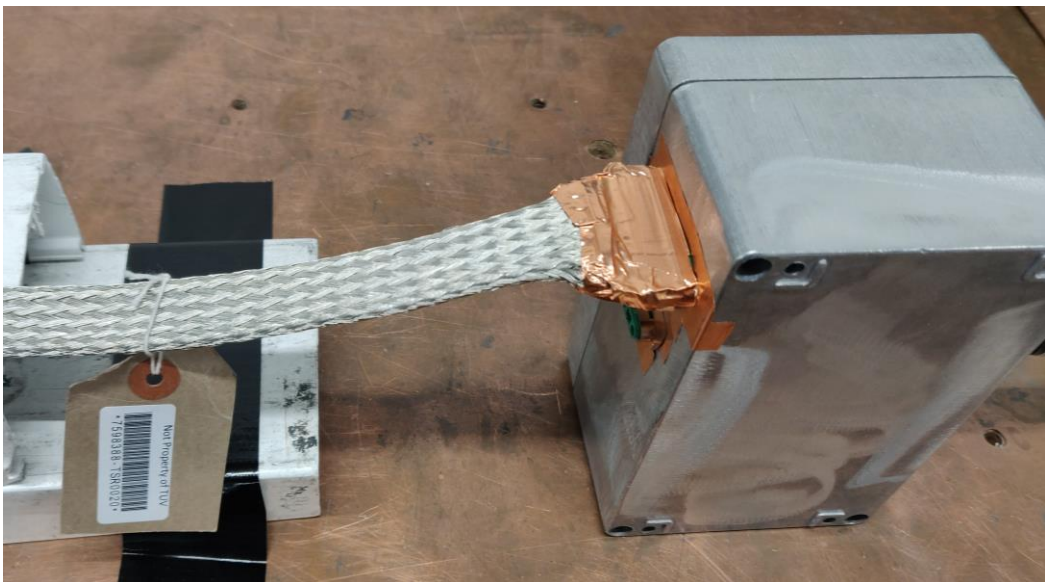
Copper Screening on the Back shells: 50-way cable assembly
